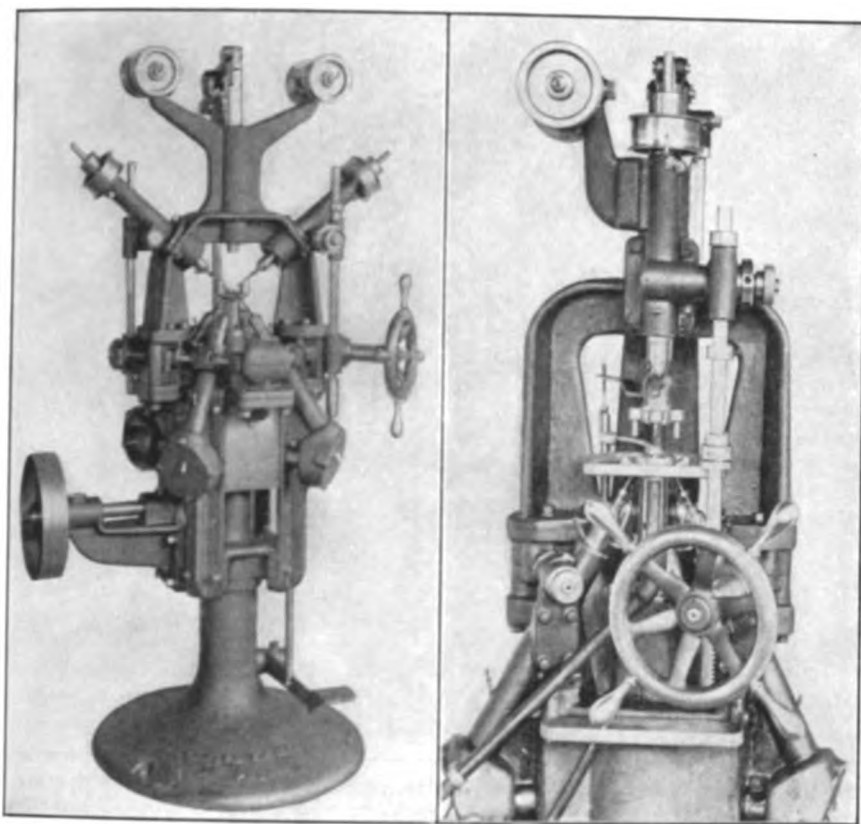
DRILL FOR SIX ANGULAR HOLES
